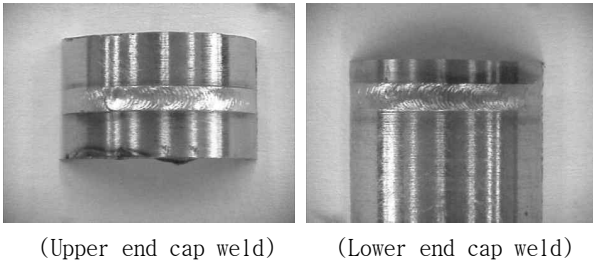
Weld bead appearances using Fiber laser ($\times 20$)
